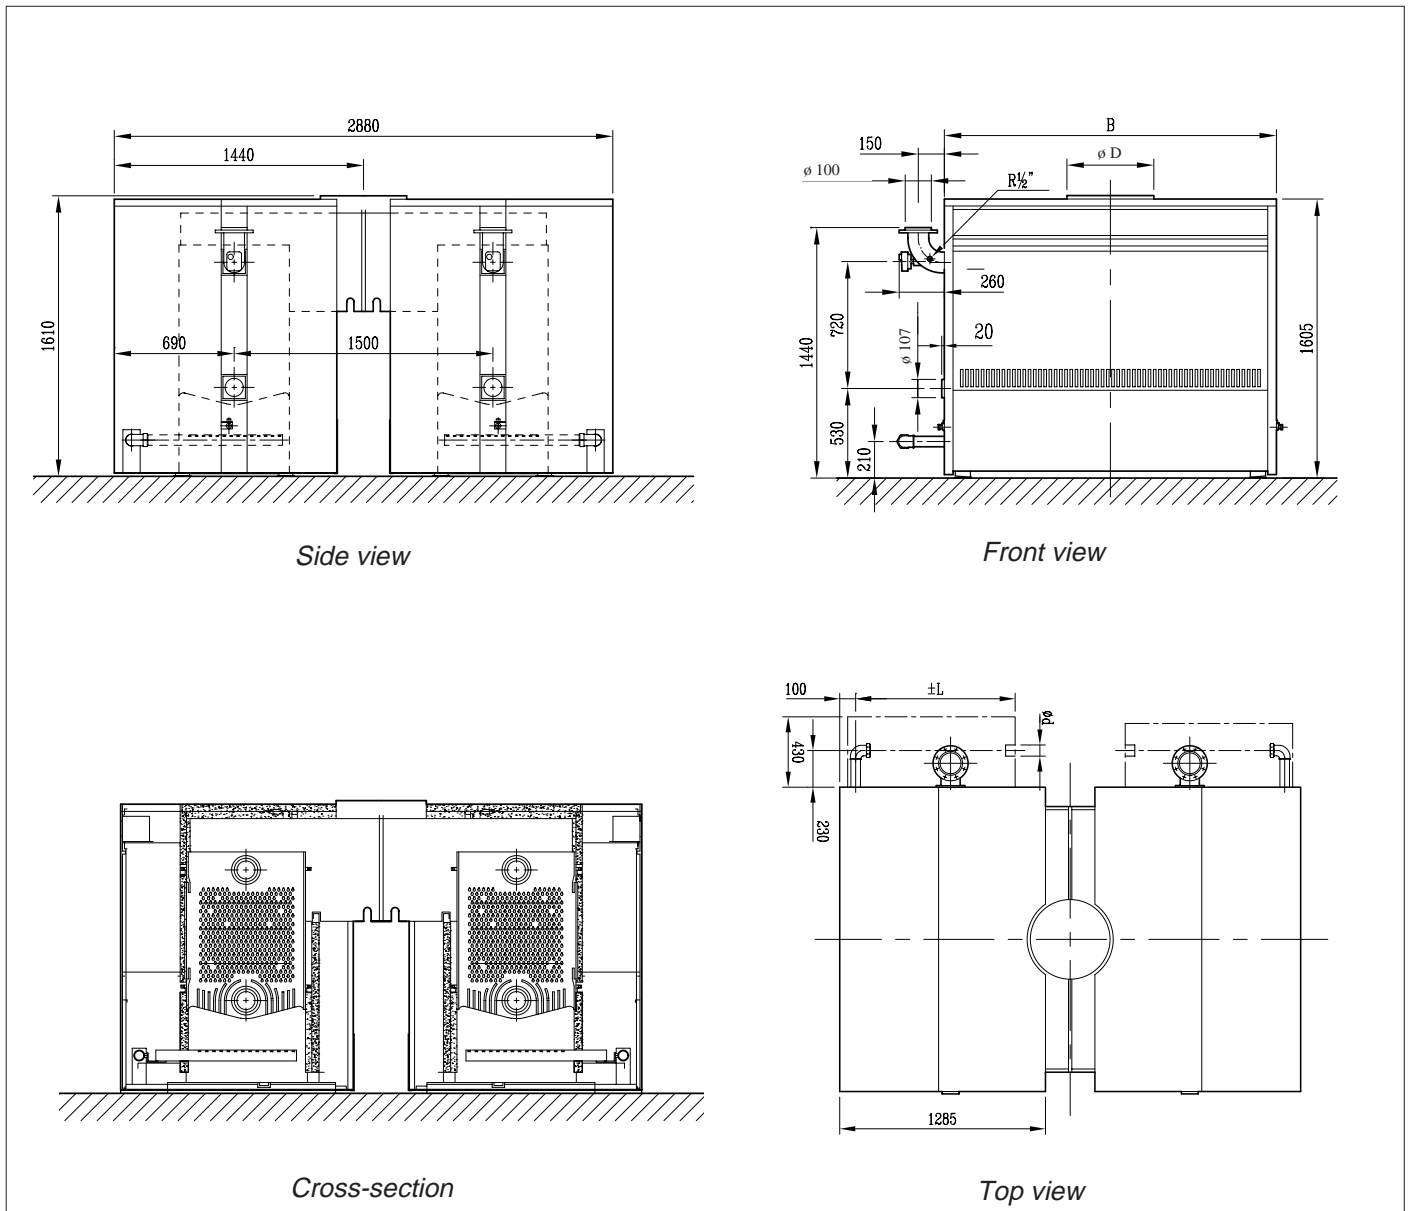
Dimensions of the Broag remeha Gas 5a Duo
